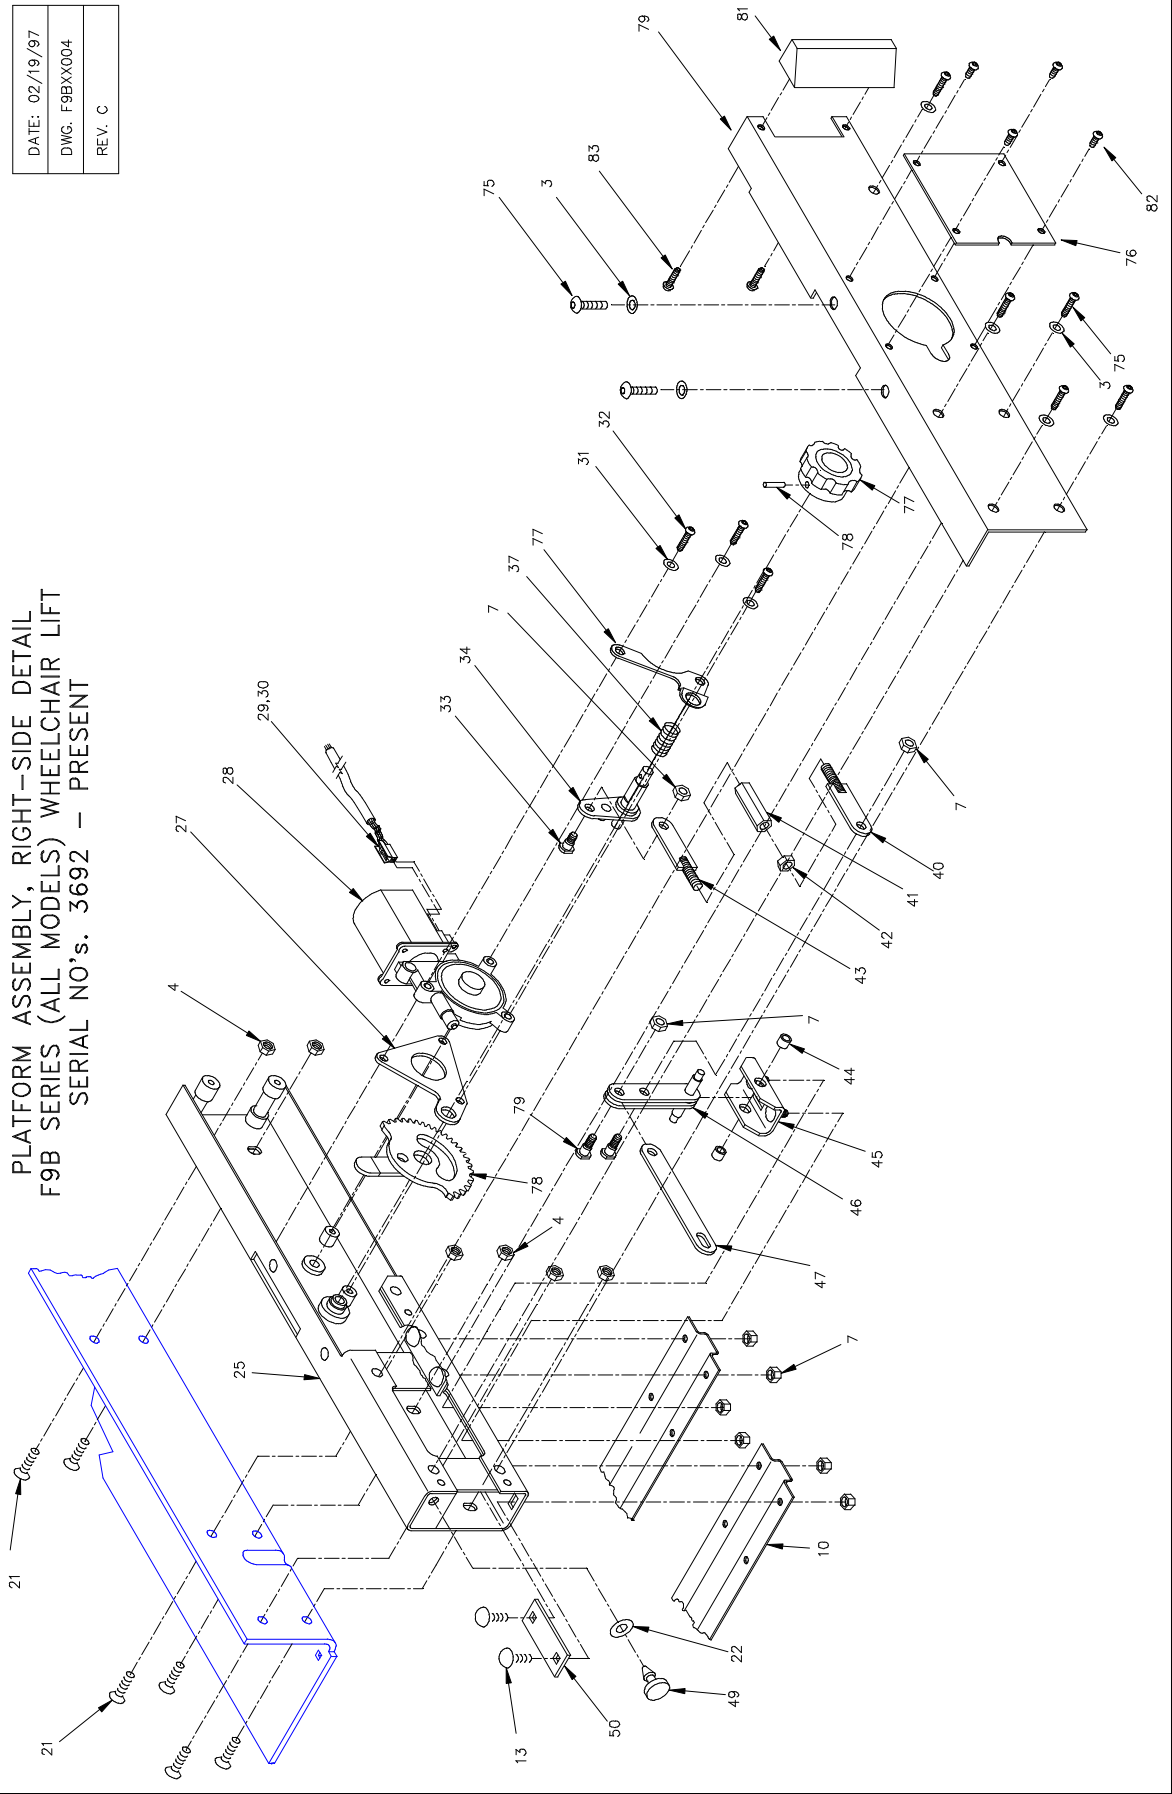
PLATFORM ASSEMBLY, RIGHT SIDE DETAIL
